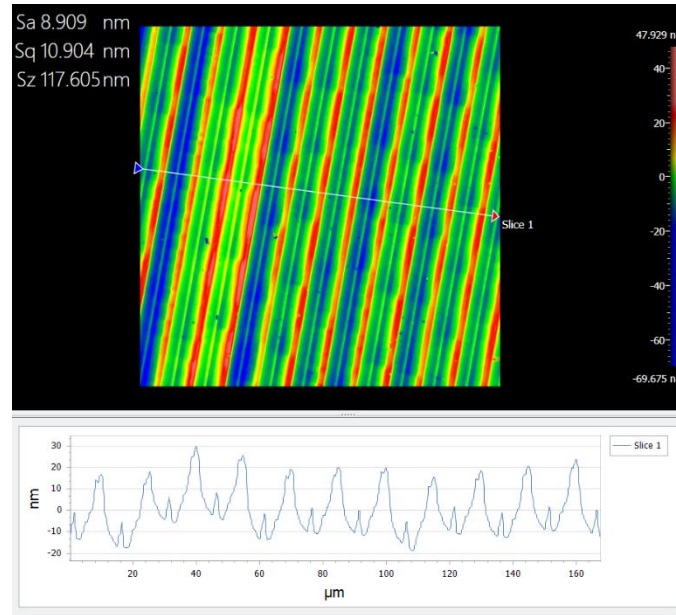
Diamond tool wear damage at the bottom of the cusp structure
